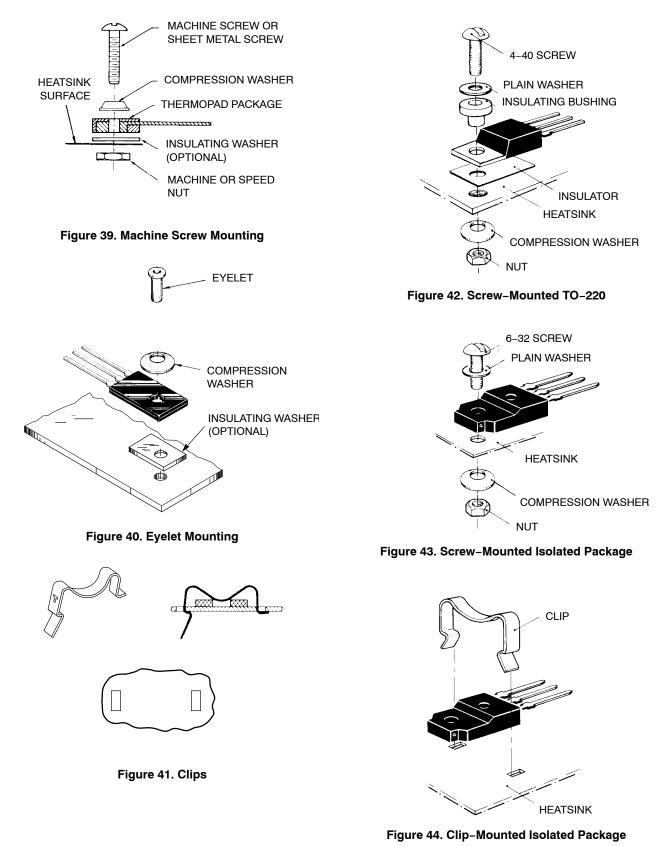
through Figure 41 shows details of mounting Case 77 devices. Clip mounting is fast and requires minimum hardware, however, the clip must be properly chosen to insure that the proper mounting force is applied. When electrical isolation is required with screw mounting, a bushing inside the mounting hole will insure that the screw threads do not contact the metal base.
